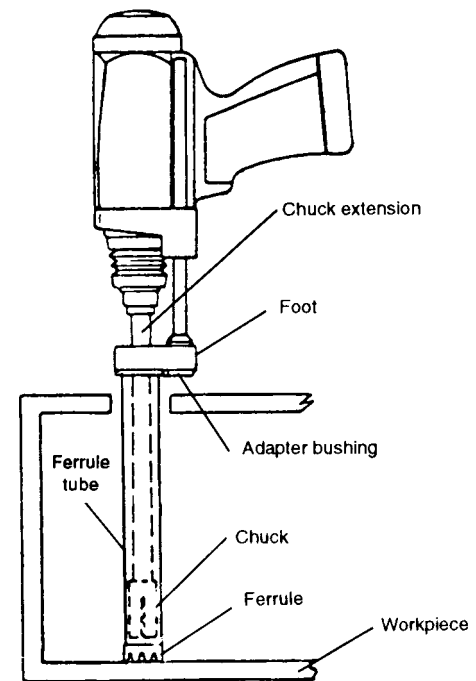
Portable stud arc welding gun equipped with accessories for welding studs through or into a drilled or formed hole
